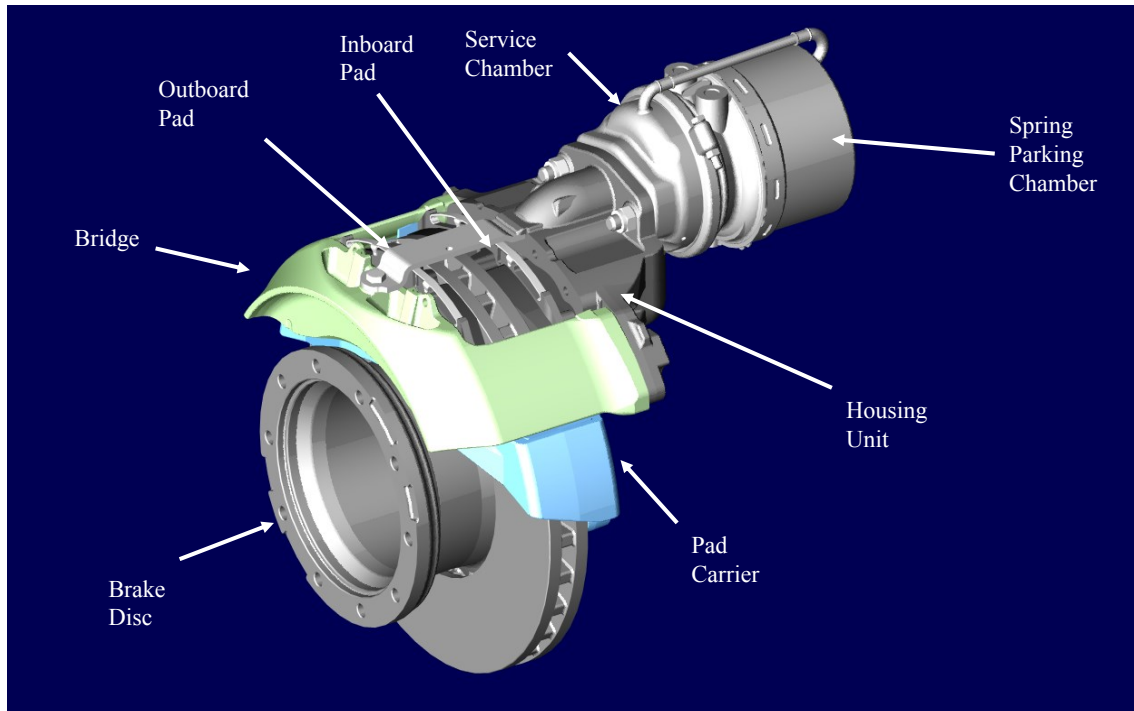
The LM 120 Offset D-Elsa Brake Assembly
